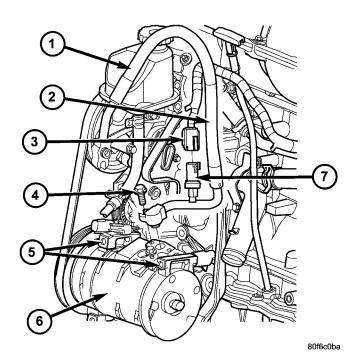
A/C Compressor Removal/Installation 2.4L Turbo
